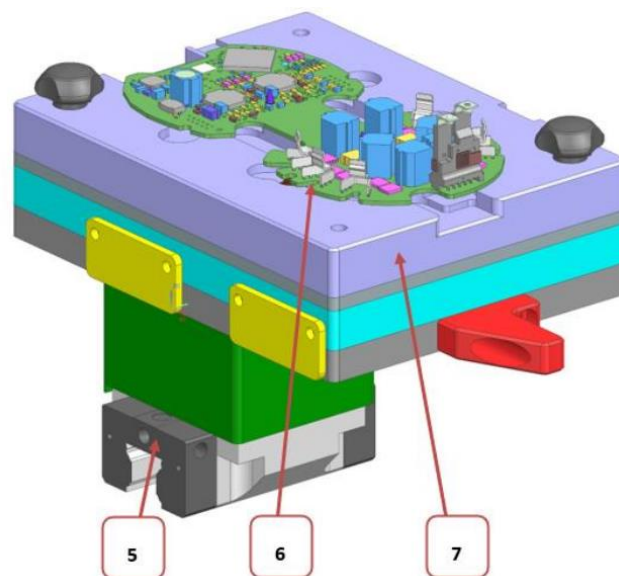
A horizontal manipulator bed: 5 – a carriage, 6 – a PCB board, 7 – a plate
